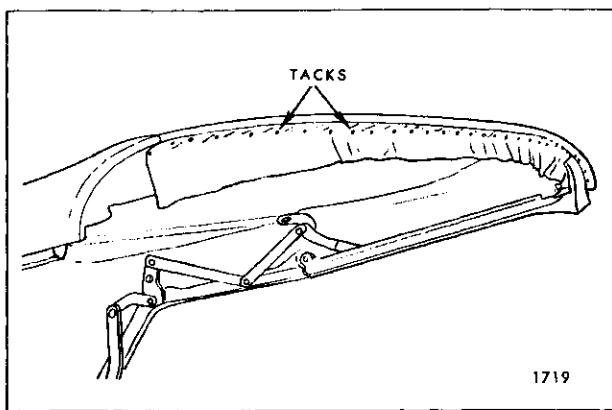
Installation Of Top Material To Front Roof Rail
